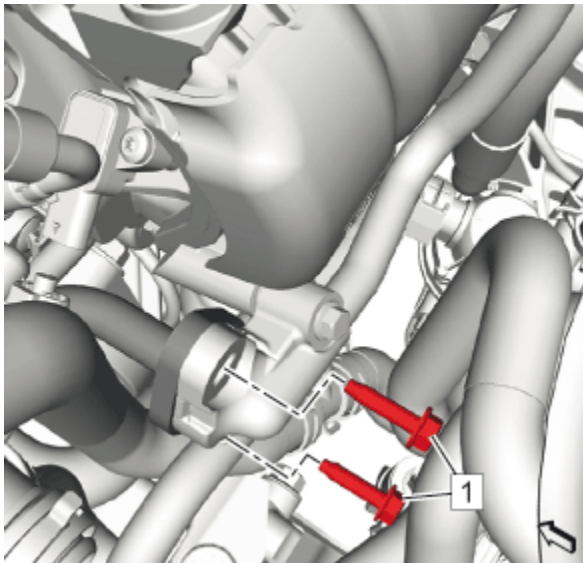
Exhaust Gas Recirculation Pipe Bolts
